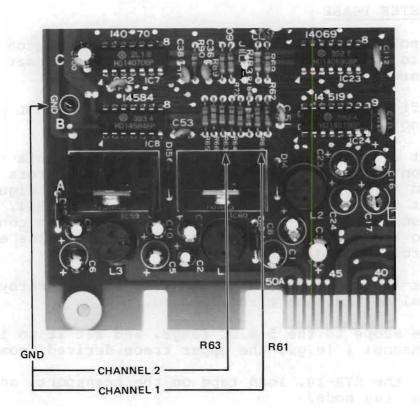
TEST POINTS ON REEL CONTROL PCB FOR TACH PHASE CHECK
